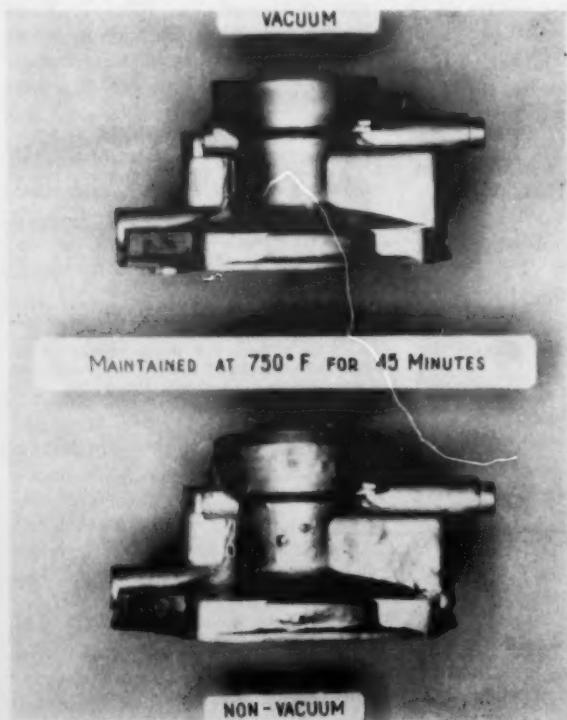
Casting finish can be destroyed by the effects of air trapped in the mold during pouring.
